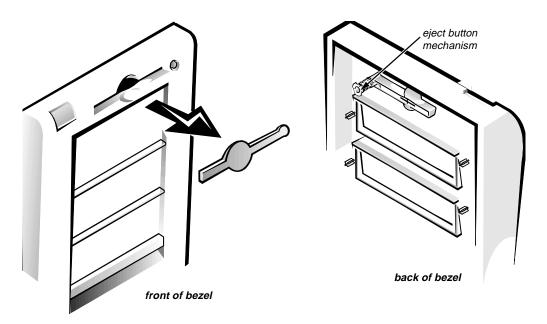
3.5-Inch Front-Panel Insert Removal
